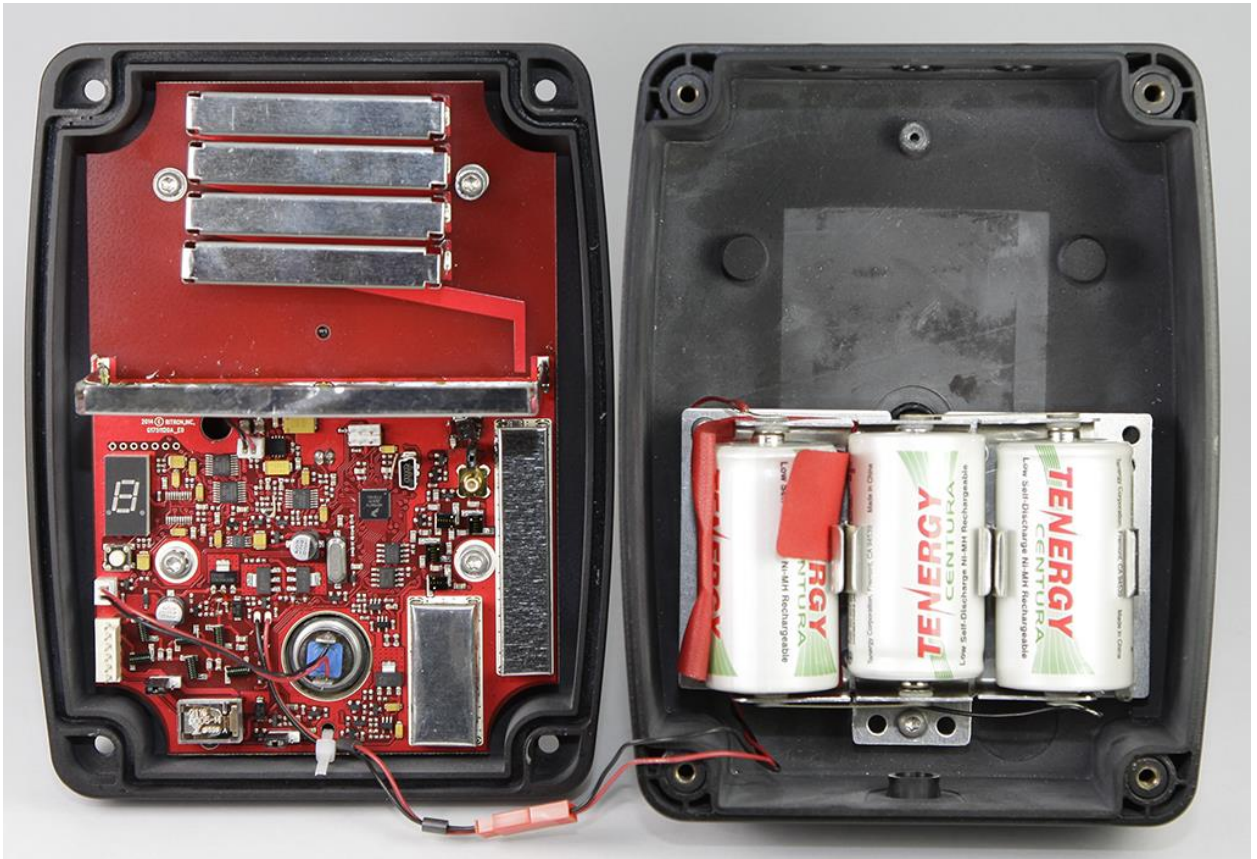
complete top side PCB assembly with shields and internal antenna installed
